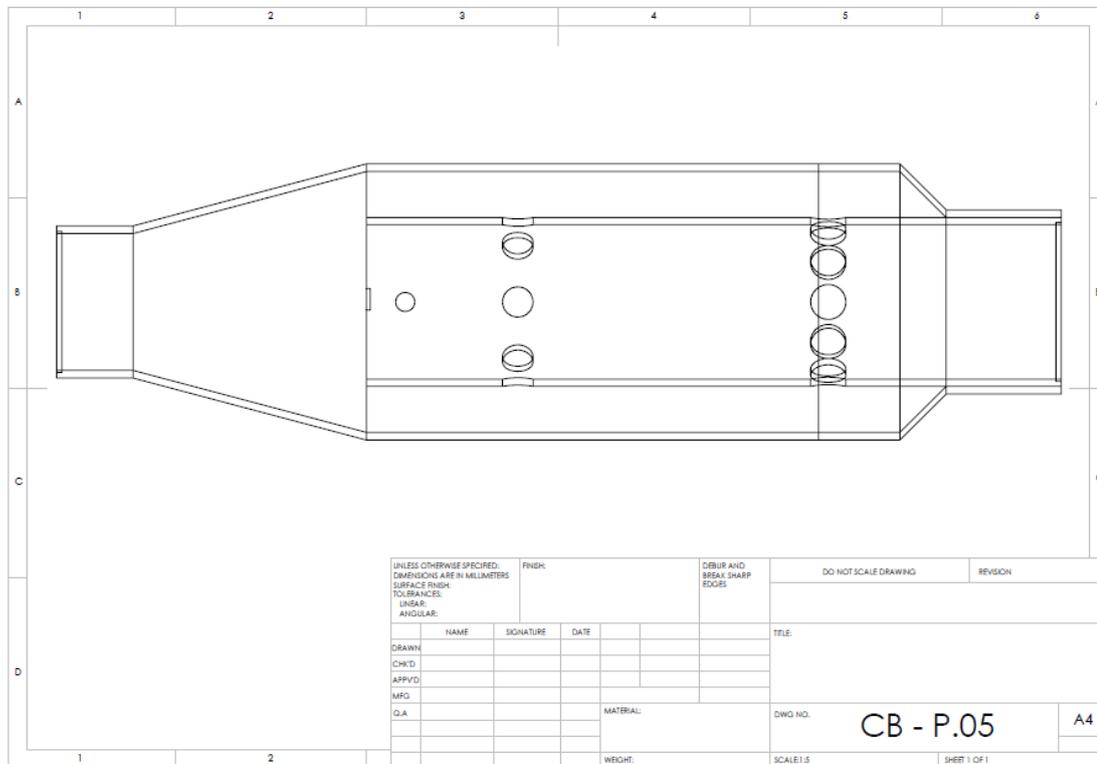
Two-dimensional drawing of completed assembled combustion chamber
